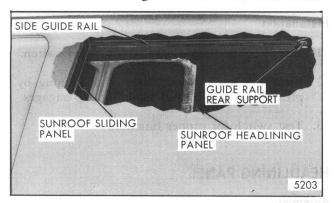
Sun Roof Panel Headlining Engagement in Side Guide Rail
